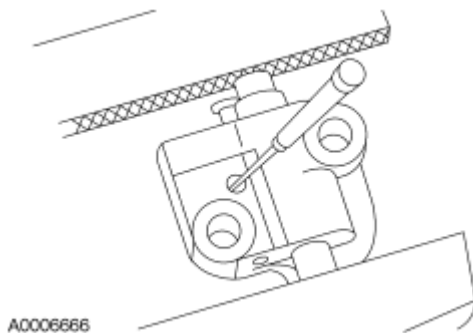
Holding Chain Tensioner Ratchet Lock Mechanism Away From Ratchet Stem
